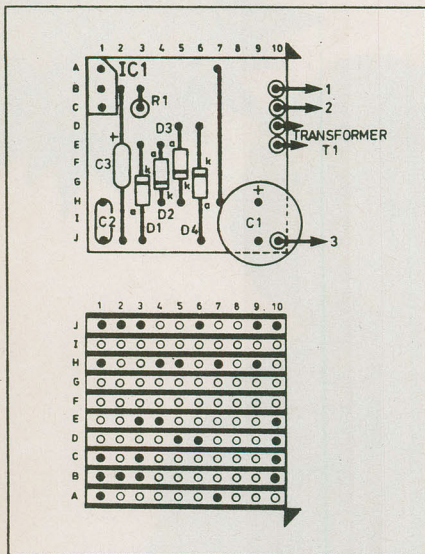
Component layout and details of wiring to the transformer secondary winding and to the DIN socket.
